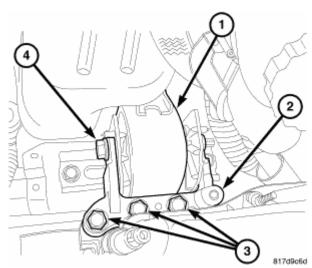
RIGHT ENGINE MOUNT Courtesy of CHRYSLER LLC
